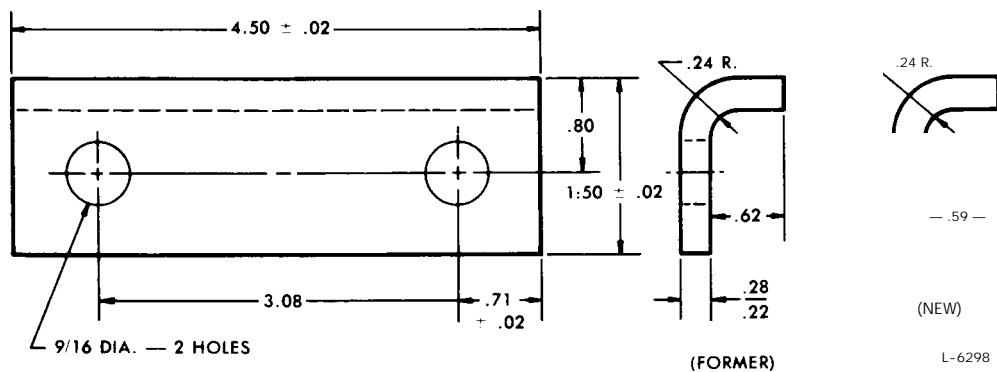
Former and Current End Clamps Used on One-Piece Exhaust Manifold
